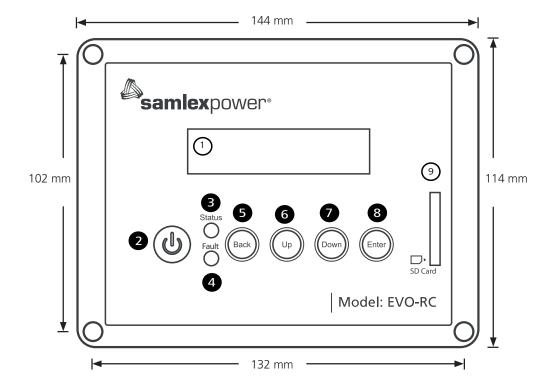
Optional Remote Control EVO-RC - Layout & Dimensions
